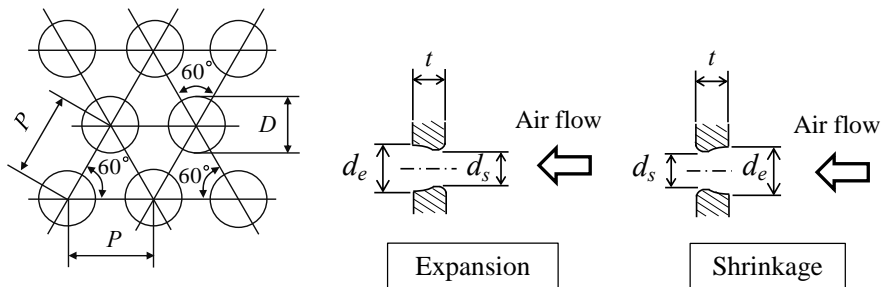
Hole arrangement and cross-sectional view of hole on a perforated metal plate. A cross section of "Expansion type" is expanded toward the downstream. "Shrinkage type" is opposite shape of "Expansion type".
